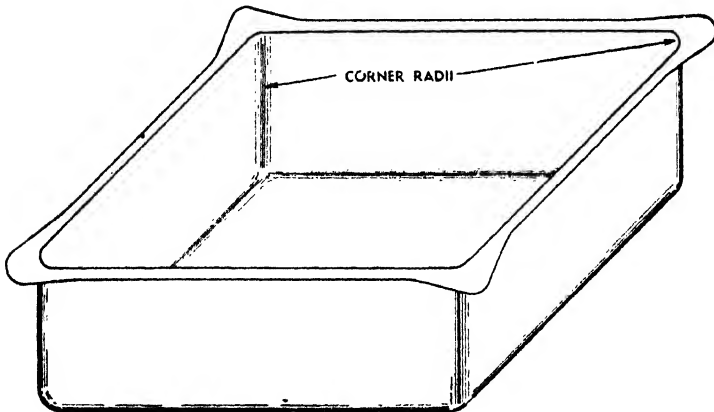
Corner radii joining the side walls of drawn parts should be large, five times metal thickness being about the minimum for ductile material in a part such as this.
